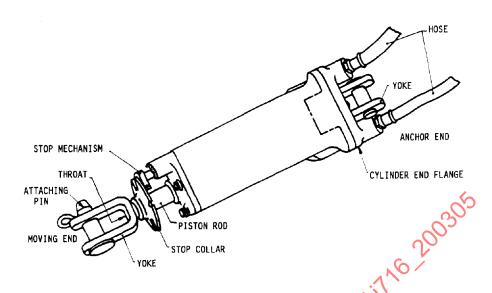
HYDRAULIC CYLINDER—GENERAL VIEW
